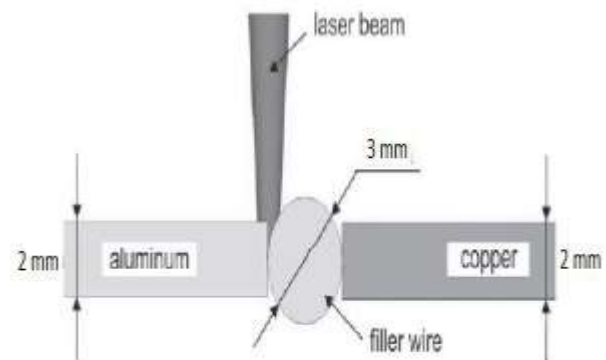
Laser welding of aluminum and copper using the filler wire [5]
